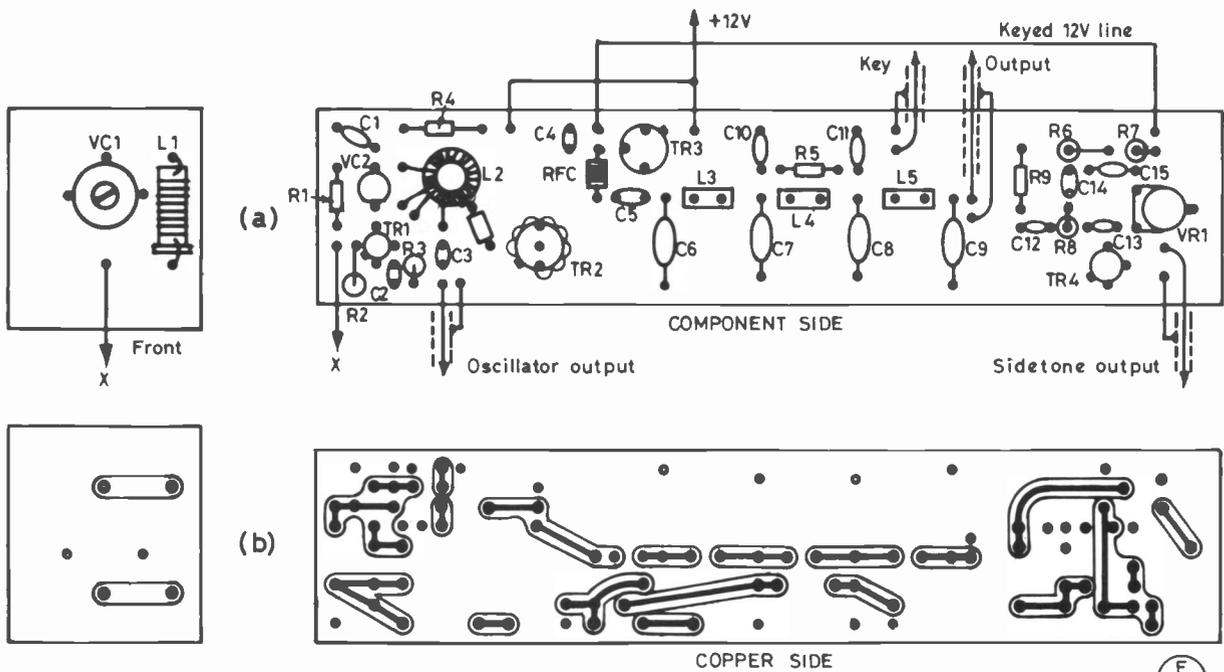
JLD TRANSMITTER P.C.B LAYOUT
